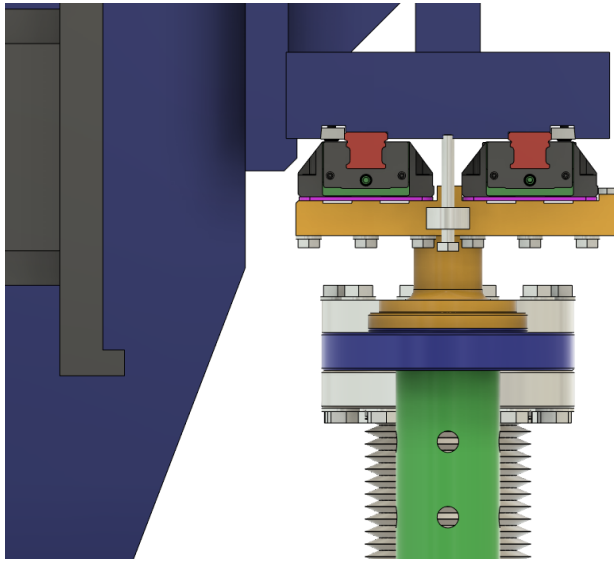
Front view onto the pillar - frame connection. The vacuum components are shown in grey and cut out to see the connection. The air - vacuum interface is between the yellow stamp and the blue flange of the pillar and the stamp is connected to the black sliders which can move into the longitudinal direction (into the picture) to compensate thermal contractions of the girder. Shimming plates (pink) can be inserted between slider and stamp to change the length of the pillars.
